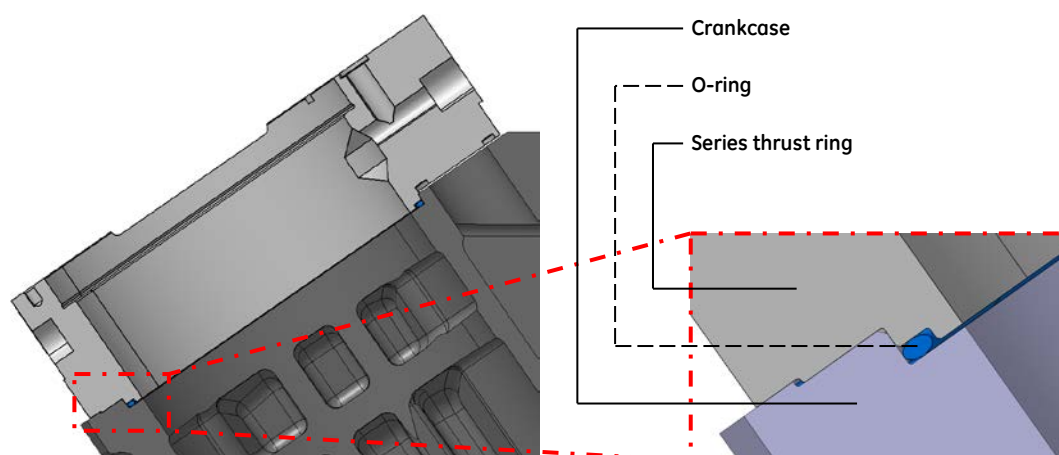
Series thrust ring when installed – sectional view (section surfaces not shown hatched)
